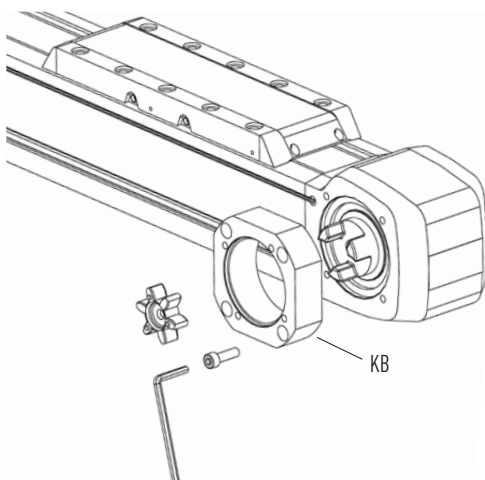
Attaching the elastomer insert and mounting the coupling housing KB on the HM-B linear axis
